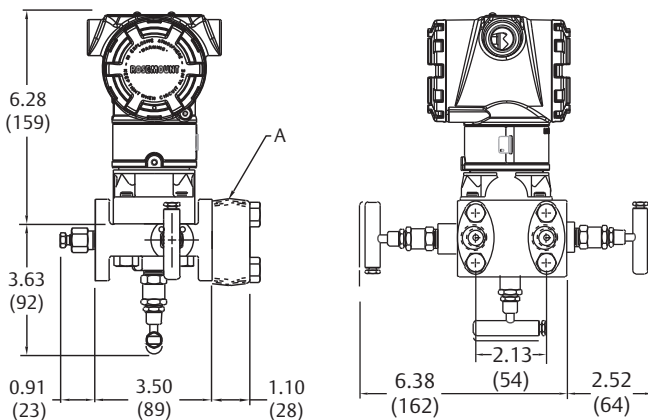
Rosemount 3051C Coplanar with Traditional Flange
